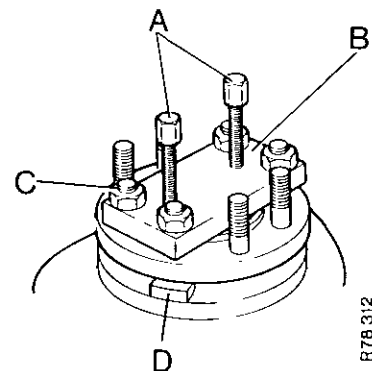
REMOVING FINAL DRIVE SHAFT
